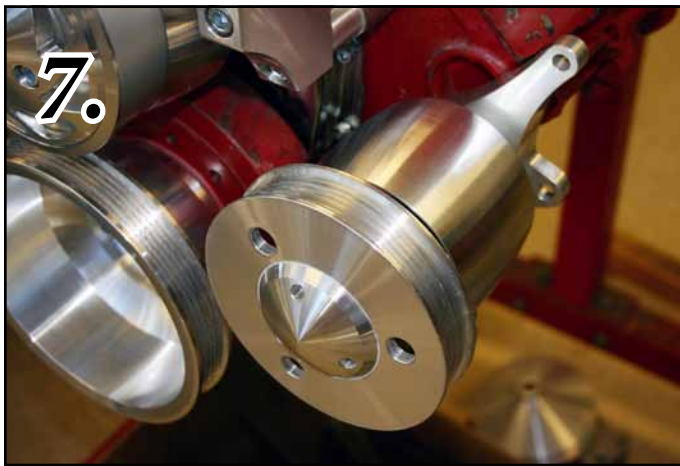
Mount the Power Steering unit to the Drivers side lower bolt holes using (2) $\frac{3}{8}$ x $1\frac{1}{4}$ " SHCS Note: The line fittings point down towards the steering box.
